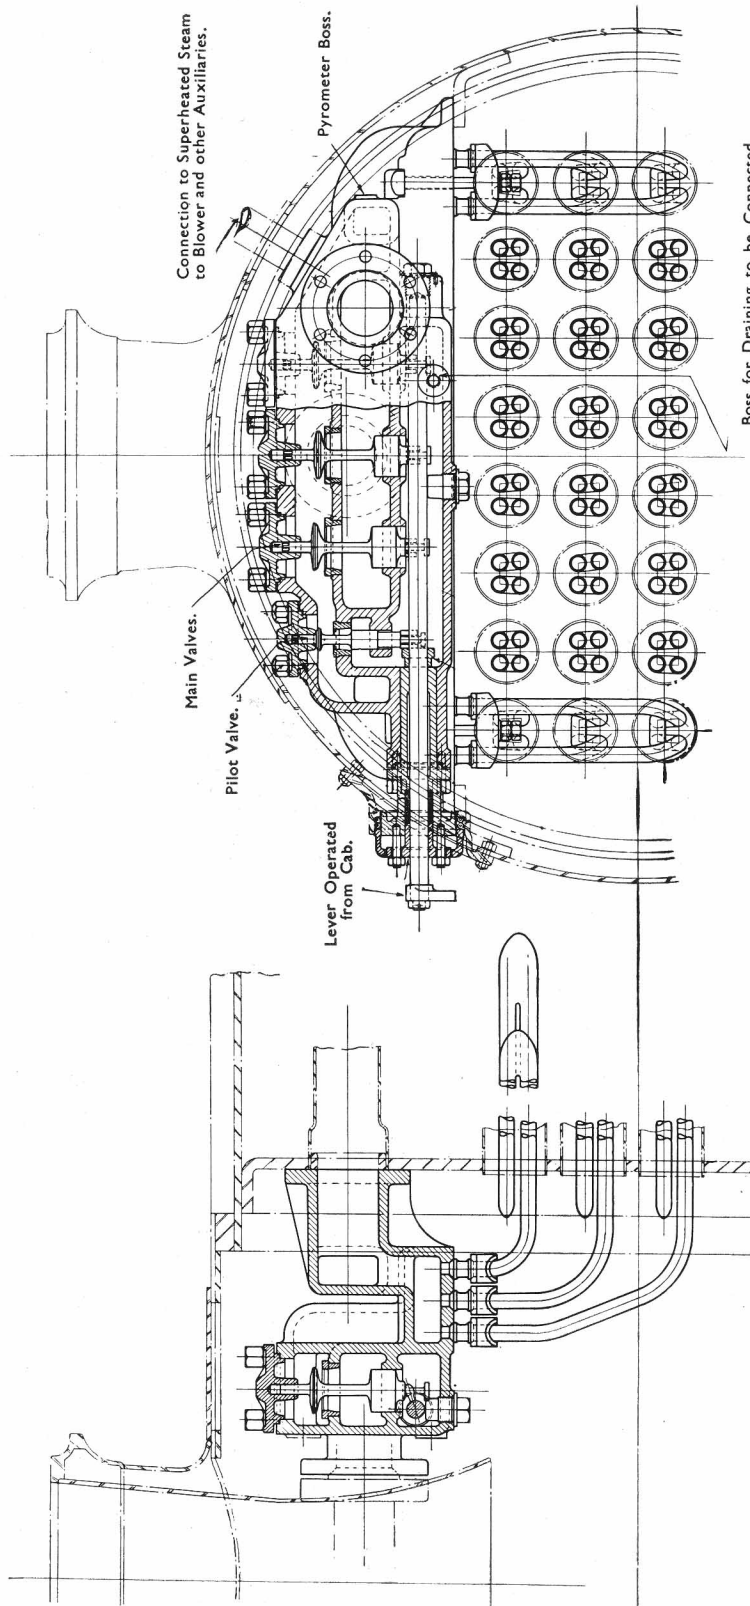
General Arrangement showing Superheater Header with Multiple Valve Regulator.
